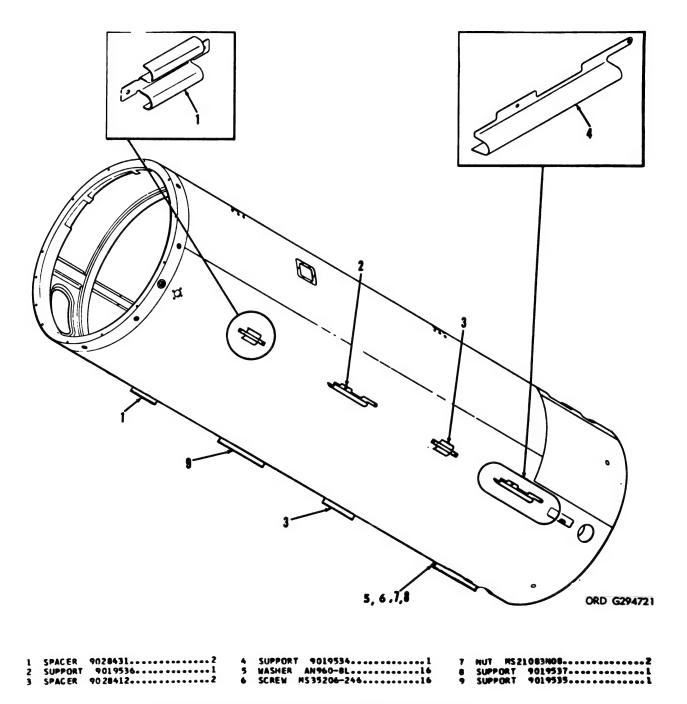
EQUIPMENT INSTALLATION, ENGINE SECTION /9028467/
